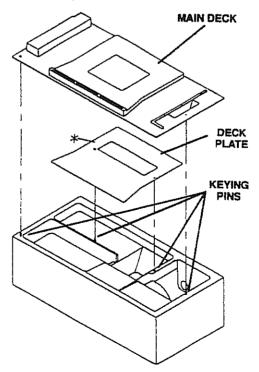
INSTALLATION OF DECK PLATE AND MAIN DECK
